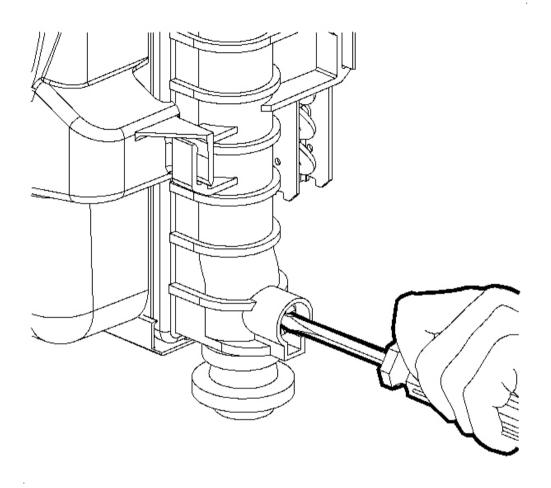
View Of Drain Valve Courtesy of GENERAL MOTORS CORP.
